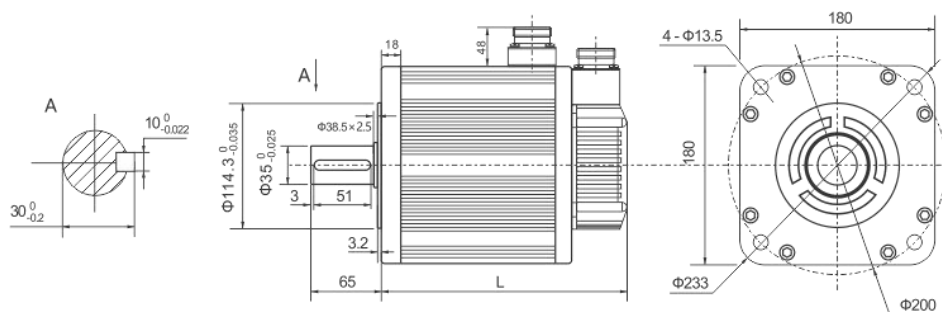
Motor dimension of 3.0kW/4.5kW/5.5kW/7.5kW
